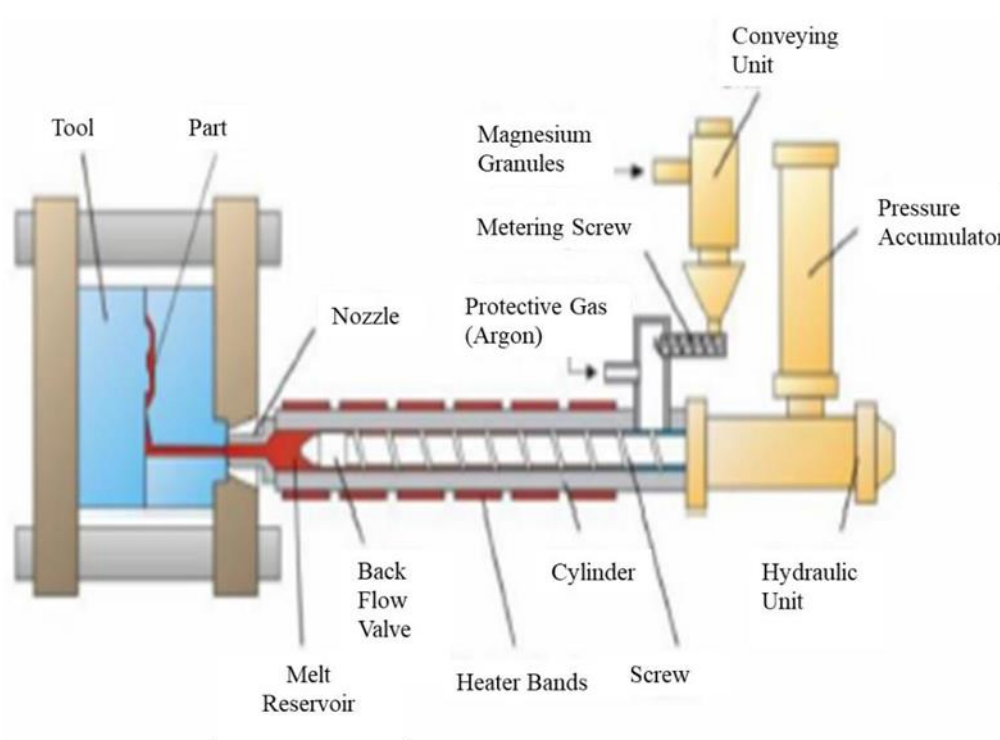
Schematic Drawing of Thixomolding Machine (Kainer, 2003)
